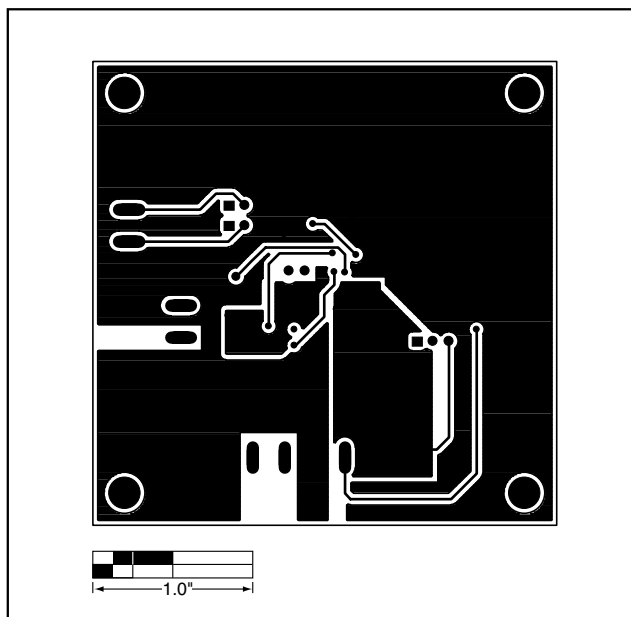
MAX1775 EV Kit PC Board Layout—Solder Side
